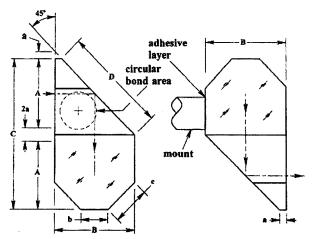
Abbe version of the Porro prism. (For design and analysis, use File 6.9 of the CD-ROM.) $t_A = 2.400A = 3.600$ in. (91.440 mm); a = 0.1A[assumed] = 0.150 in. (3.810 mm); b = 0.414A = 0.621 in. (15.773 mm); B =1.200A = 1.800 in. (45.720 mm); C = 2.200A = 3.300 in. (83.820 mm); D =1.556A = 2.334 in. (59.284 mm); $V = 1.832A^3 = 6.183$ in³ (101.321 cm³); W = $V\rho = 0.561$ lb (0.254 kg); $Q_{MIN} = V\rho a_G f_S / J = 0.017$ in.² (10.967 mm²); $Q_{MAX C} =$ 0.388 $A^2 = 0.873$ in.² (563.225 mm²).
